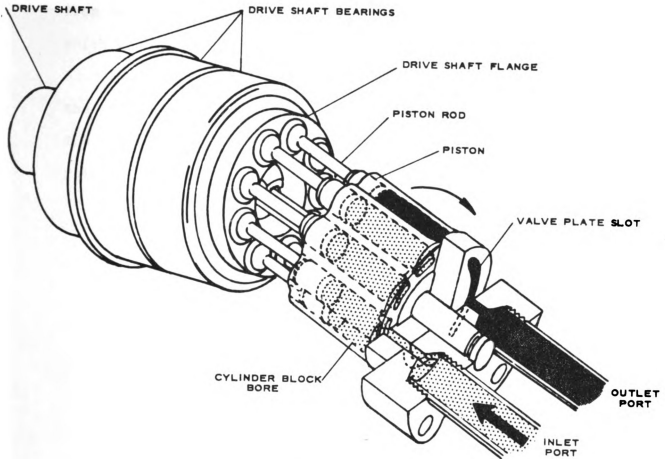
Assembly drawing of axial piston machine
